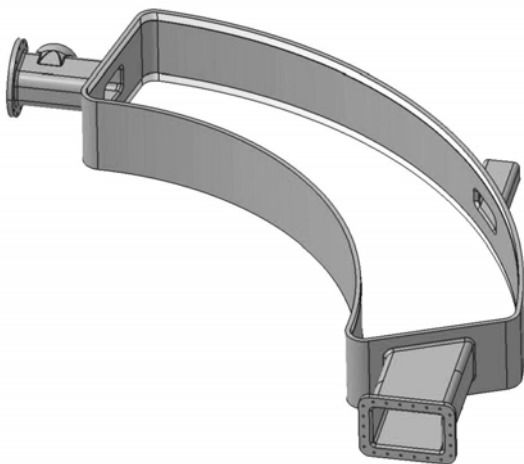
3D View of the vacuum chamber for the 90 degree bending magnet.
